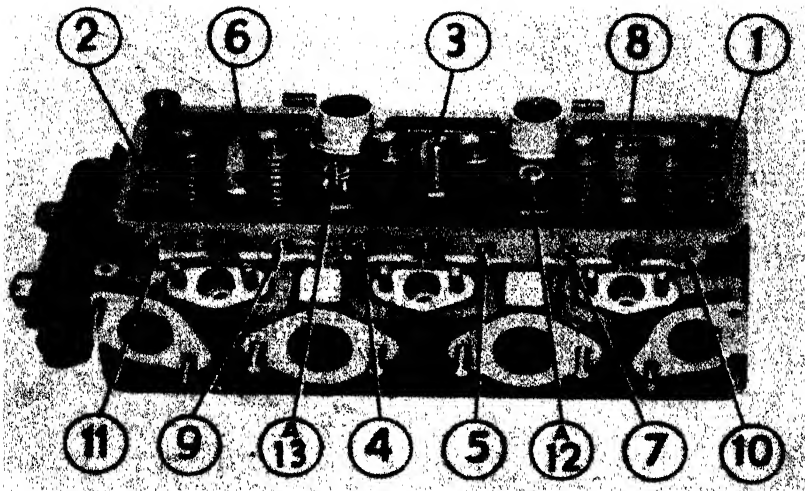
Holding-down Stud Holes of A.E.C. Cylinder Head and Jack-nuts.
